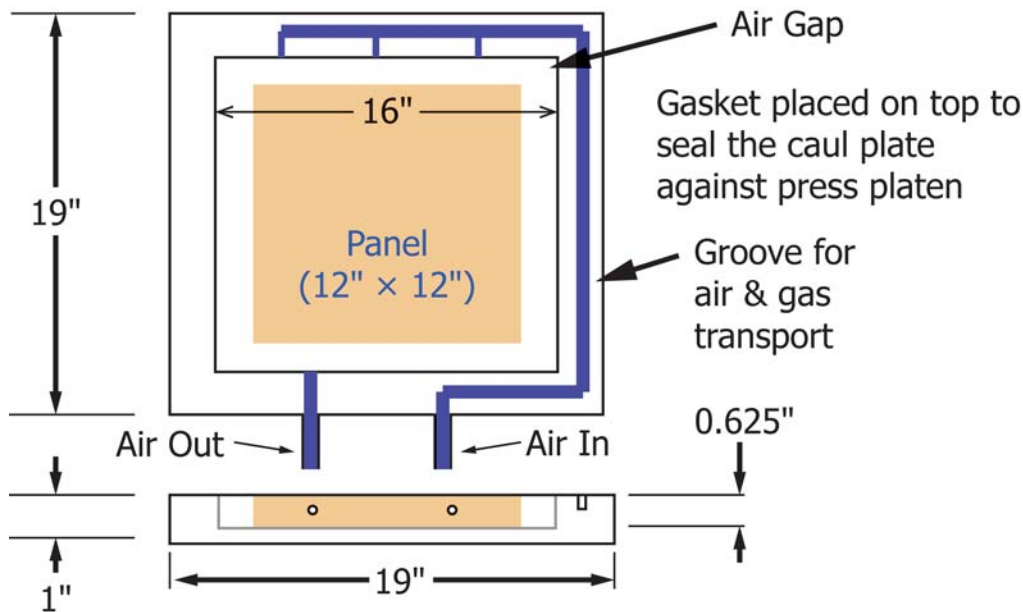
Schematic of Sealed Caul Plate and Test Panel
